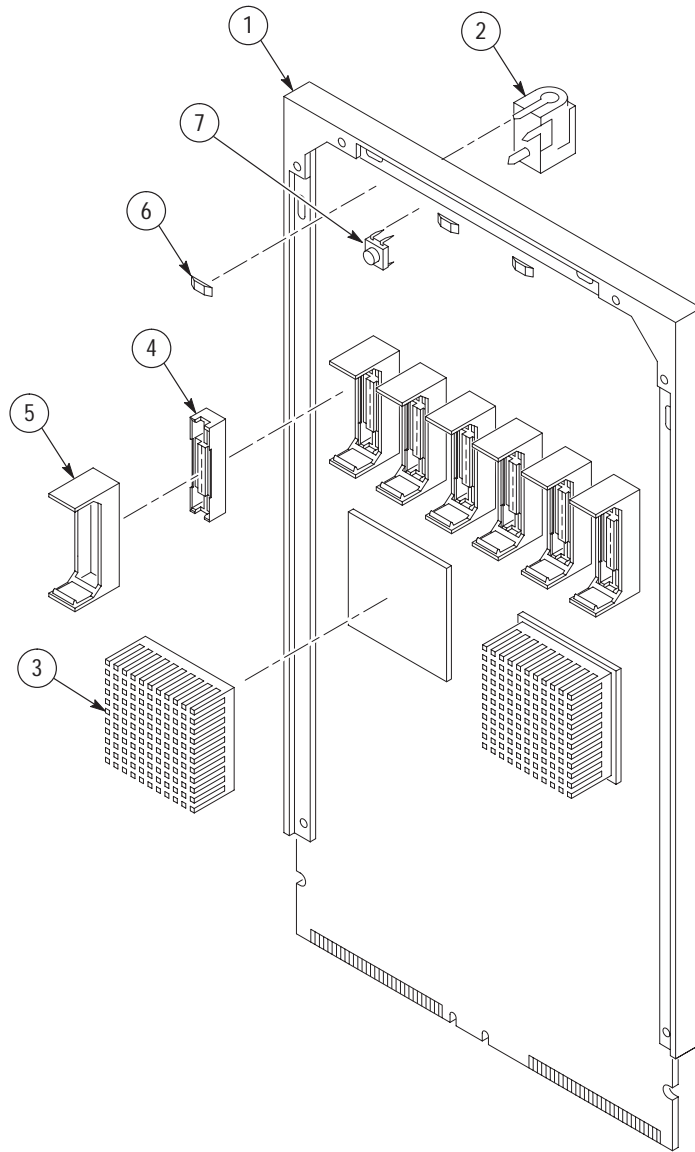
TMS 810 Rambus Direct probe adapter exploded view
